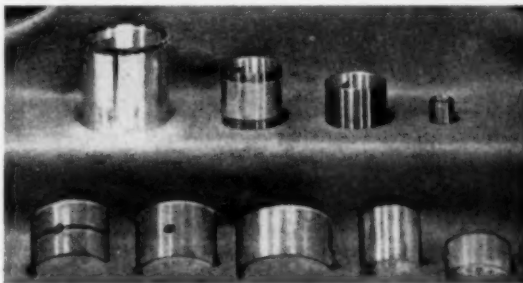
Selection of bonded, steel-backed aluminium-alloy bearings.
